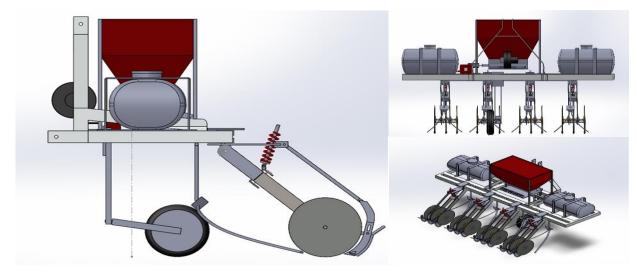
Y-drop cover crop planter (Design completed and fabrication will be completed in three months).
